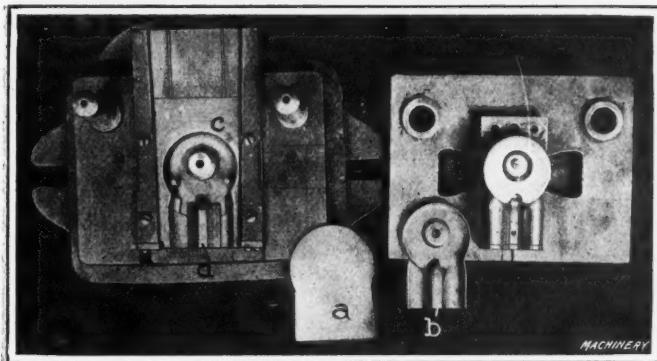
Die provided with Removable Parts at the Points of Greatest Wear
